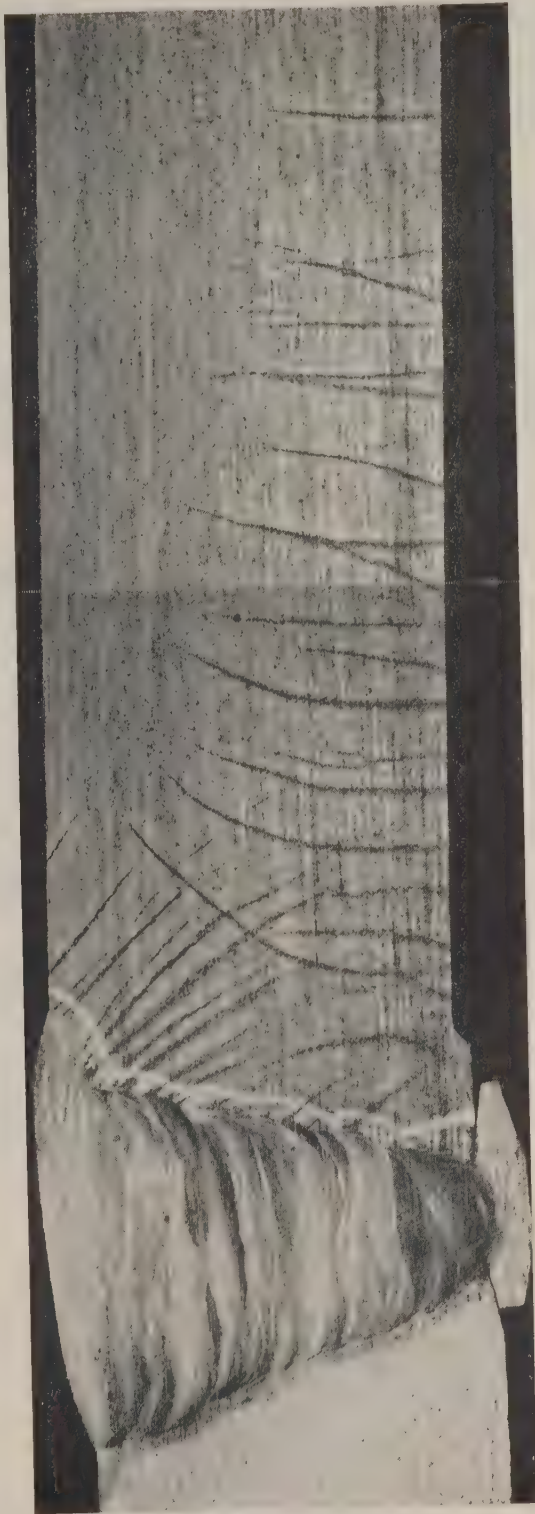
TWELVE-INCH SPOOL, REWELDED JOINT NO. 4-1A AND ORIGINAL PIPE 12 IN. TO 16 IN. FROM ORIGINAL FAILURE;  $\times 1.8$
